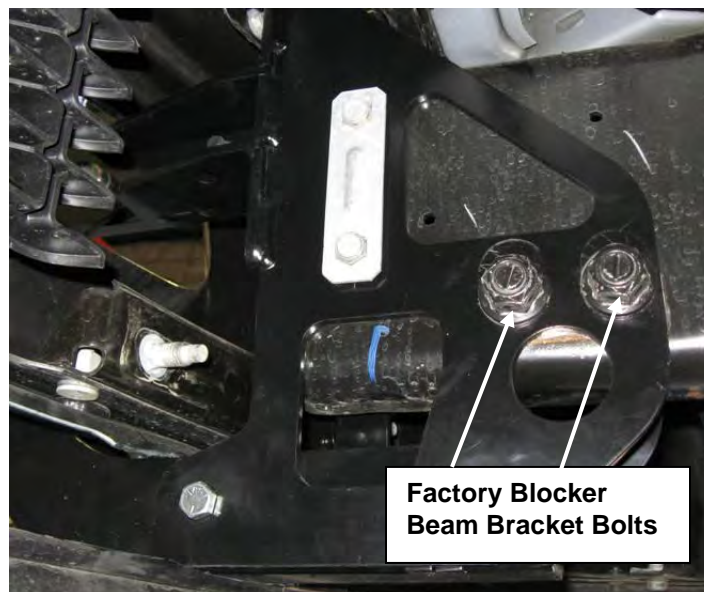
Bolts attaching Frame Extension Bracket to frame (viewed from center of vehicle, looking outward)
